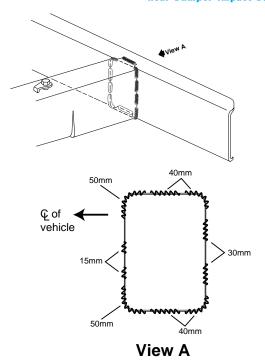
Weld Perimeter of Joint, as Indicated
